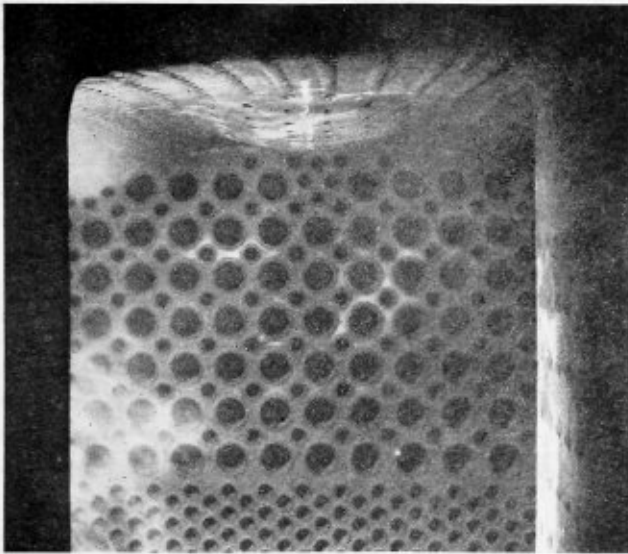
Damaged crown sheet which pocketed to a depth of $3\frac{3}{4}$ inches
